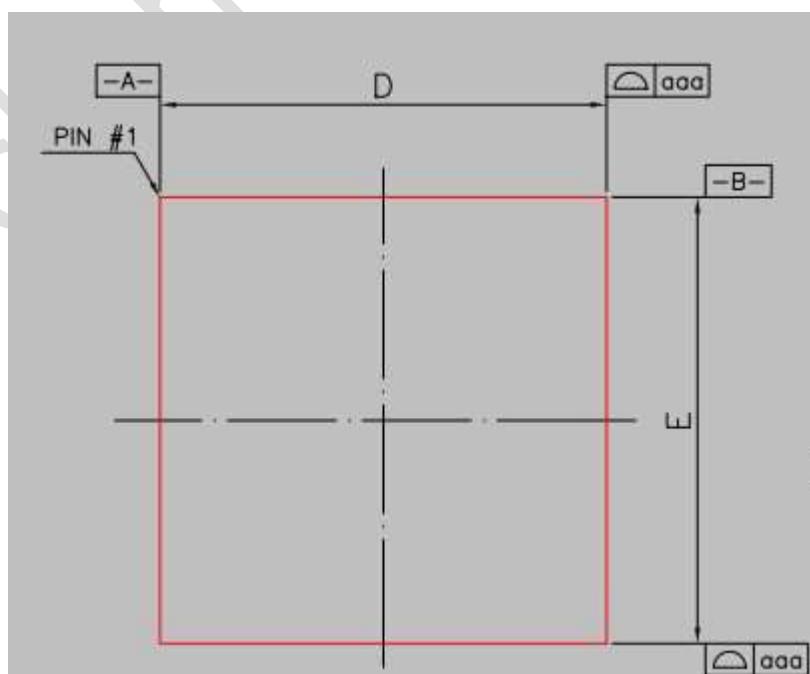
RK616 TFBGA(HF) Package Top View
